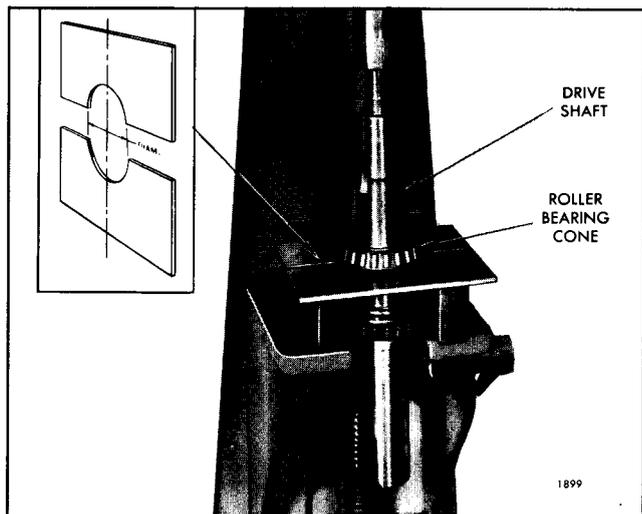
Removing Roller Bearing Cone from Clutch Drive Shaft
